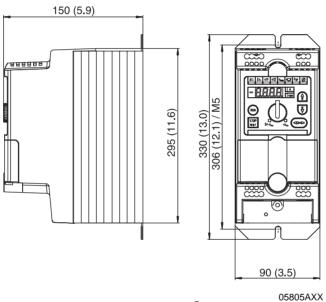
Dimensions, MOVITRAC[®] 07 size 0L
